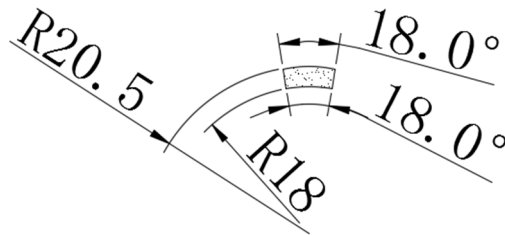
PM dimensions for 6/10 Vernier machine.
